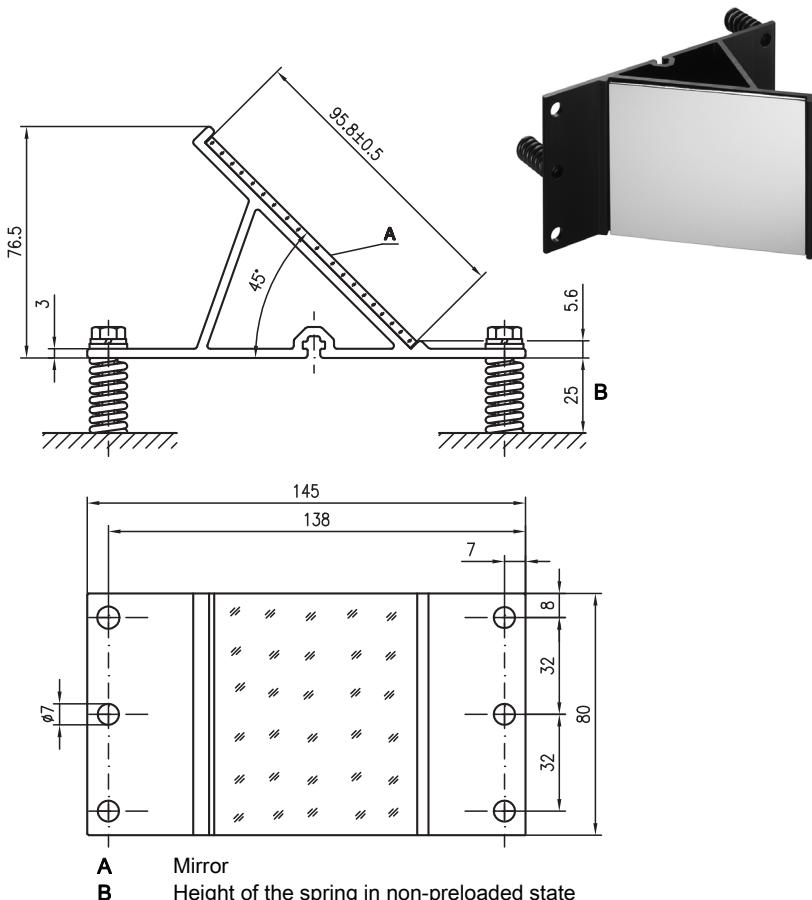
Photo and dimensioned drawing of the US 1 OMS deflector unit
